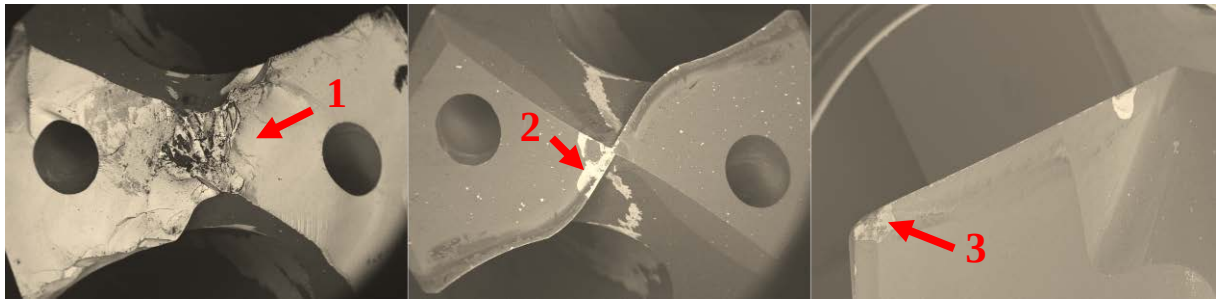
Sharpened tools: 1-Machined 500 bores; 2-Machined 900 bores; 3-Machined 50 bores
